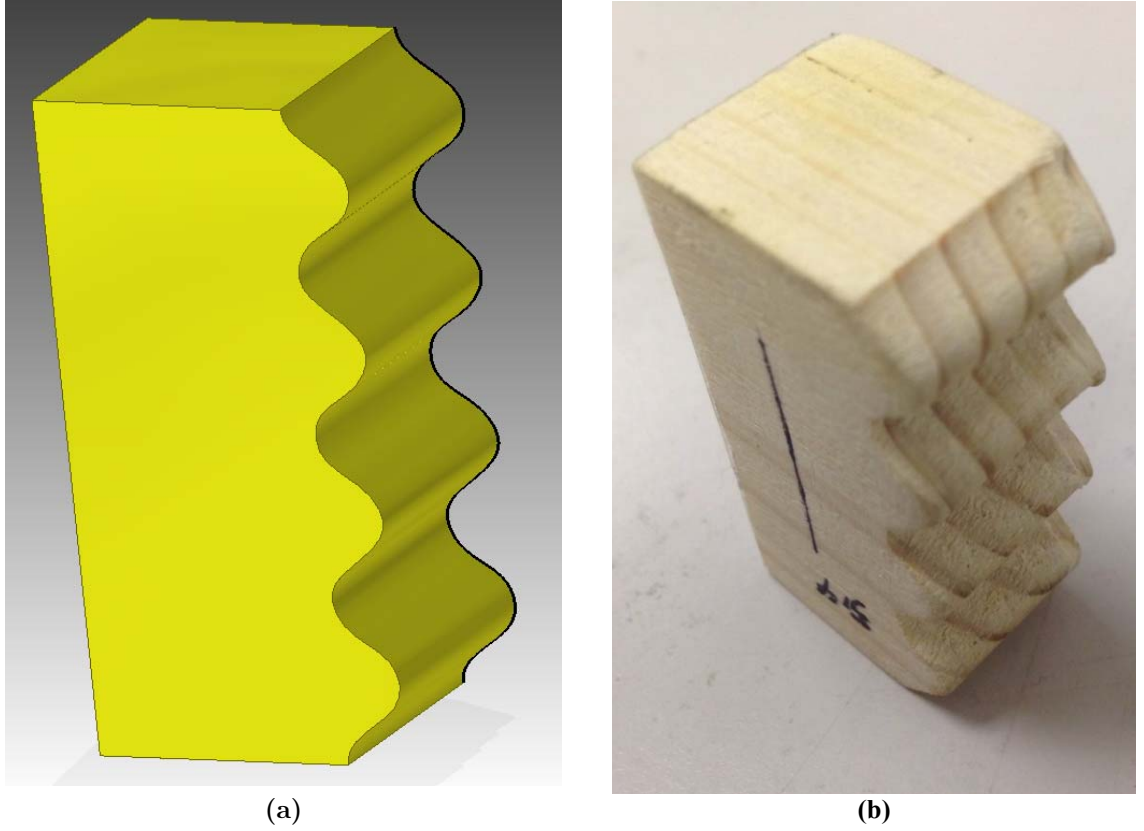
Bio-inspired bluff body; (a) CAD Model (b) CNC machined prototype
